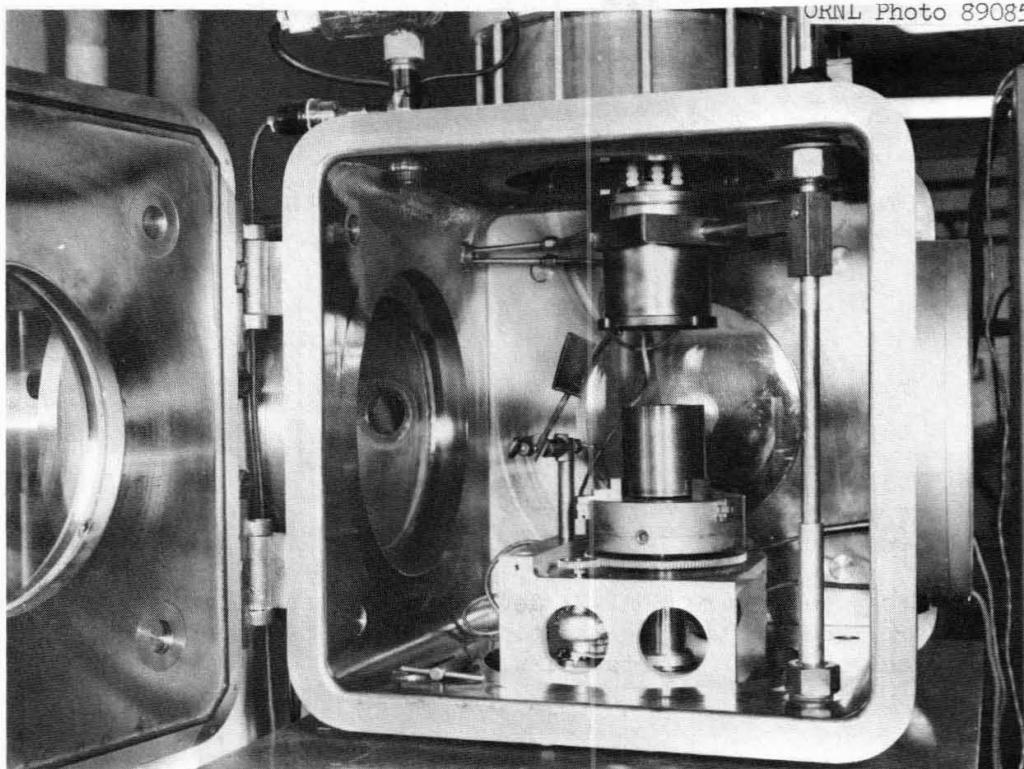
Interior of electron-beam welding chamber with capsule ready for welding.
